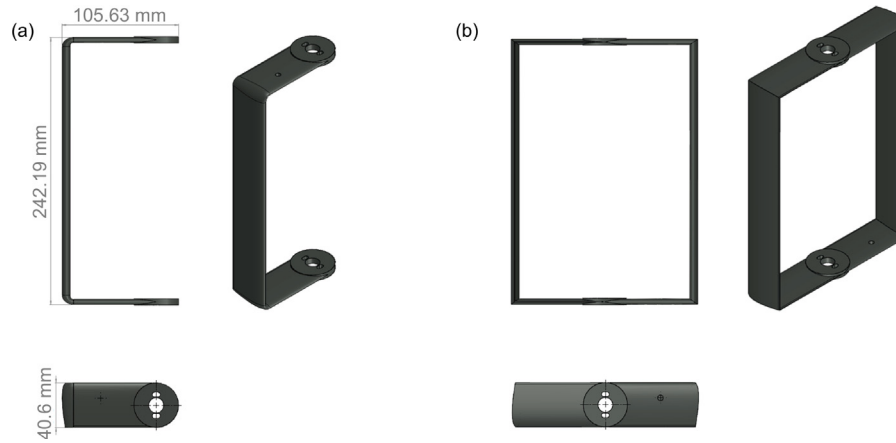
Small-scale cross-flow turbine drawings. Subplot (a) shows a one-bladed rotor with the lofted blade–strut joint design, and subplot (b) shows the two-bladed rotor with the 90-degree blade–strut design.
